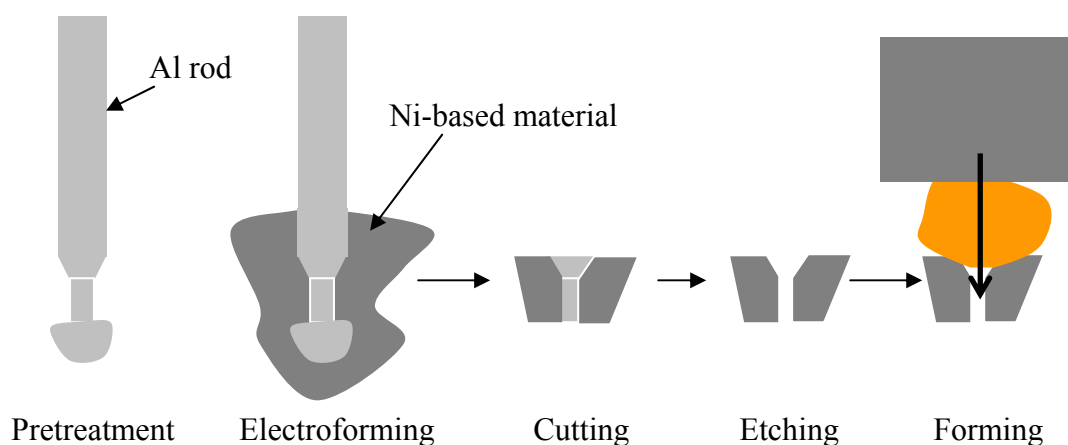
A schematic drawing of fabrication flow of tool for forming by electroforming
